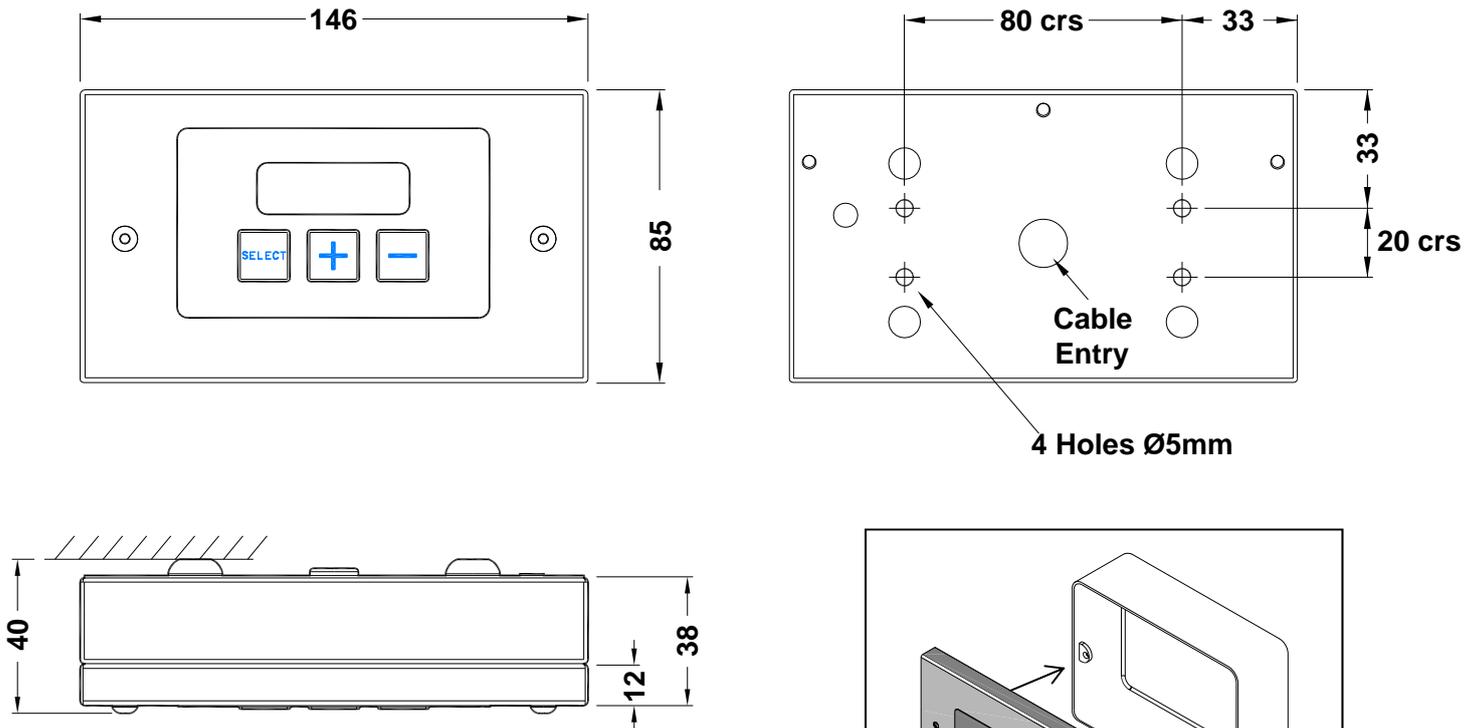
Dimensions (mm) program panel (surface mount shown, factory supplied).
